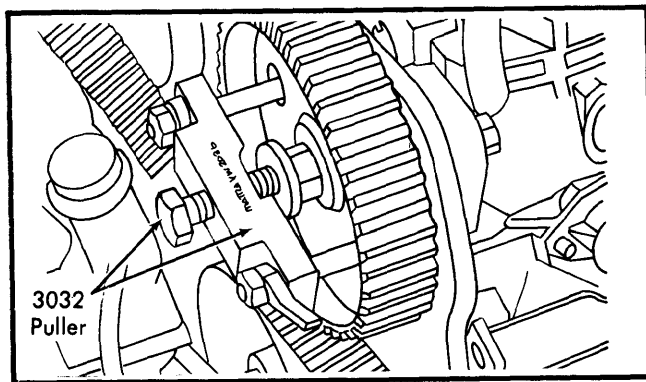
Fuel Injection Pump Gear Removal (Audi Shown)
